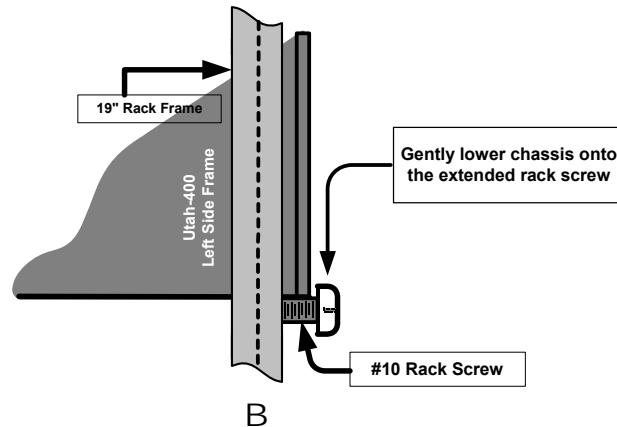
Lowering the Utah-400 Chassis on the Rack Screw
